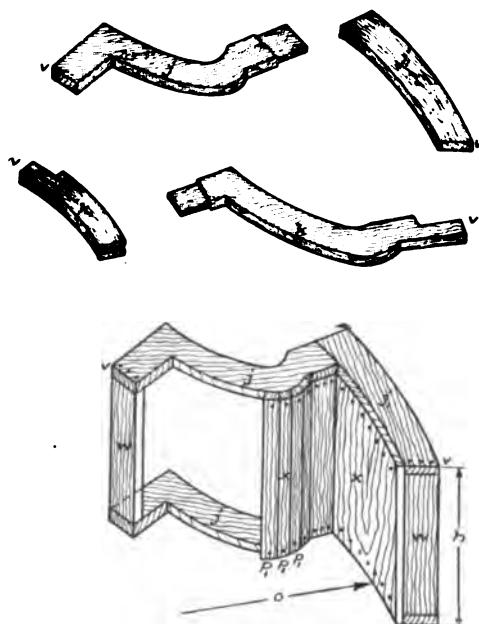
Flanges and Partially Assembled Rear Half of Core-Box Pattern
